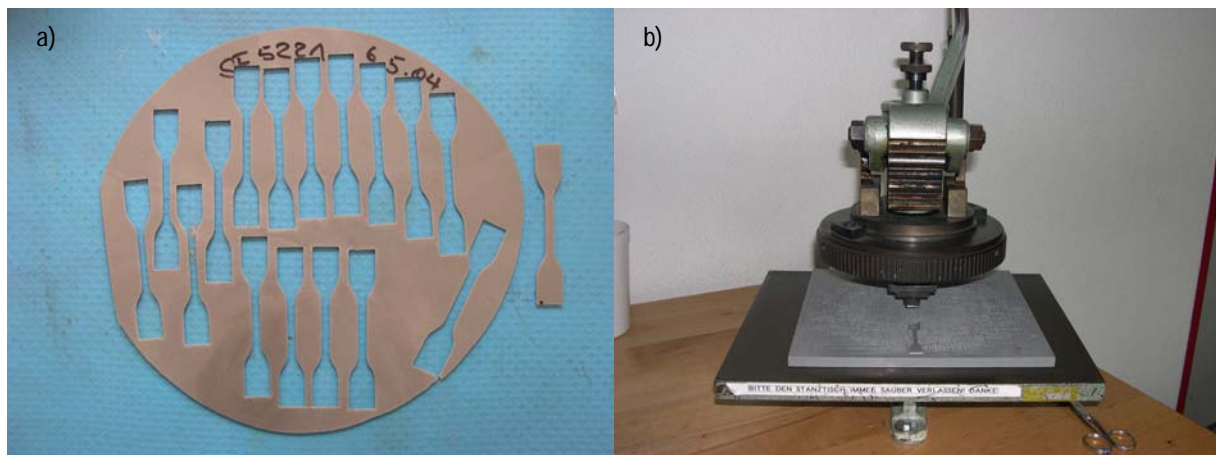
(a) Specimen 5A cut from an adhesive bulk plate; (b) Cutting machine
